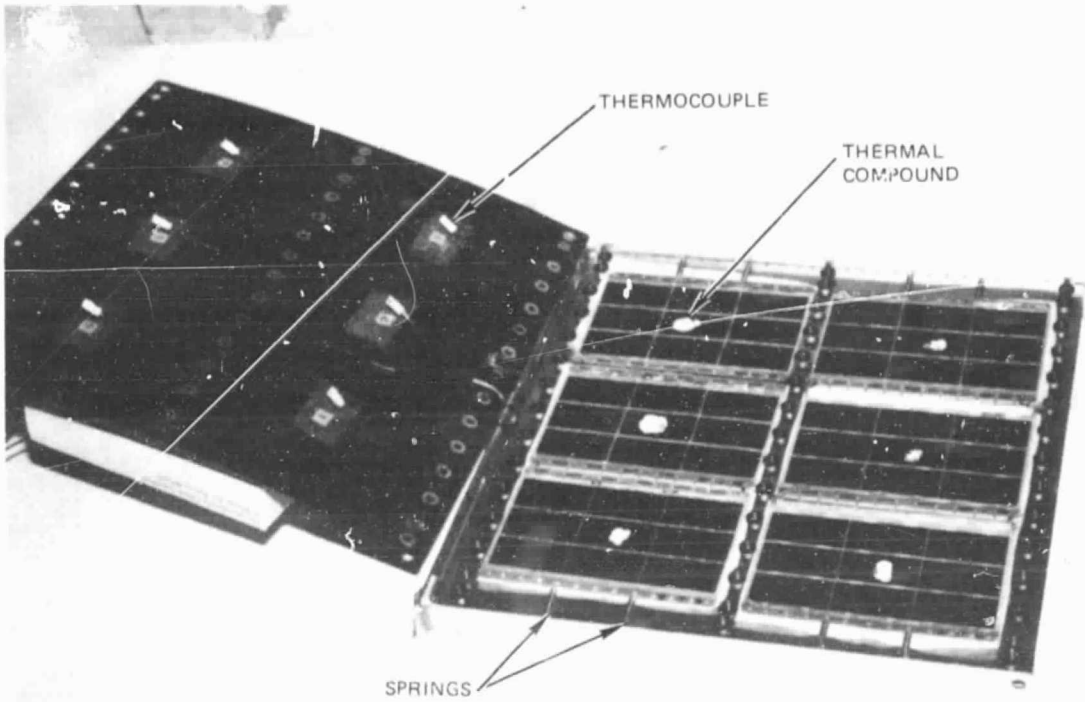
PARTIALLY ASSEMBLED MODULE TRAY
